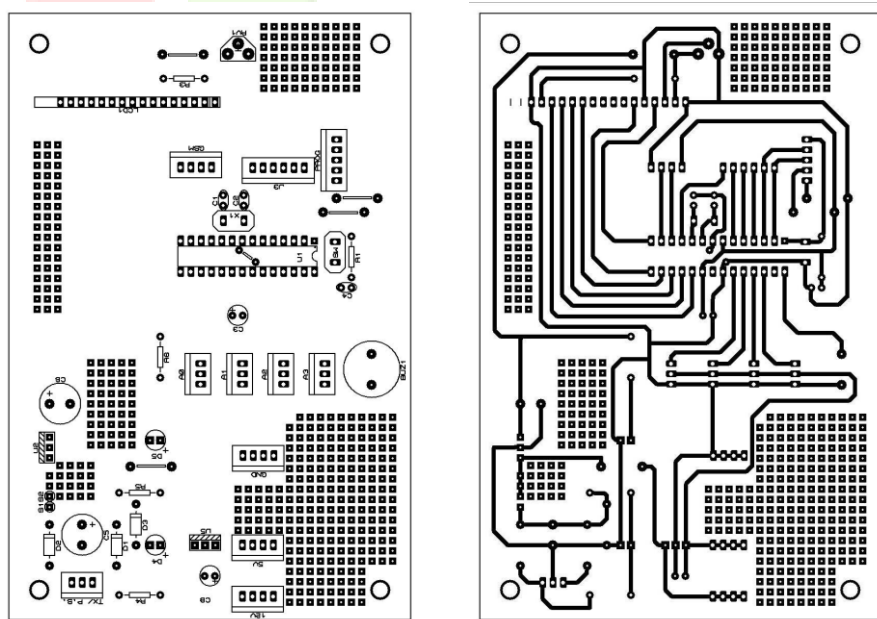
Printed circuit board artwork used for hardware integration: (a) top-side component layout and (b) bottom-side copper track layout.
